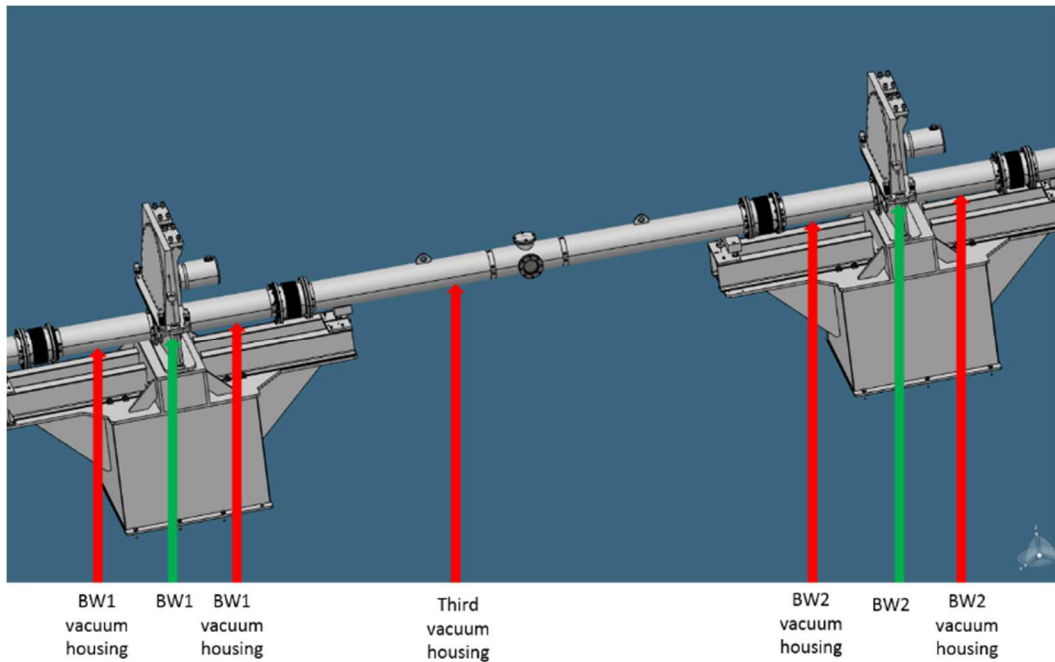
CAD view of the third vacuum housing and the chopper vacuum housings.
